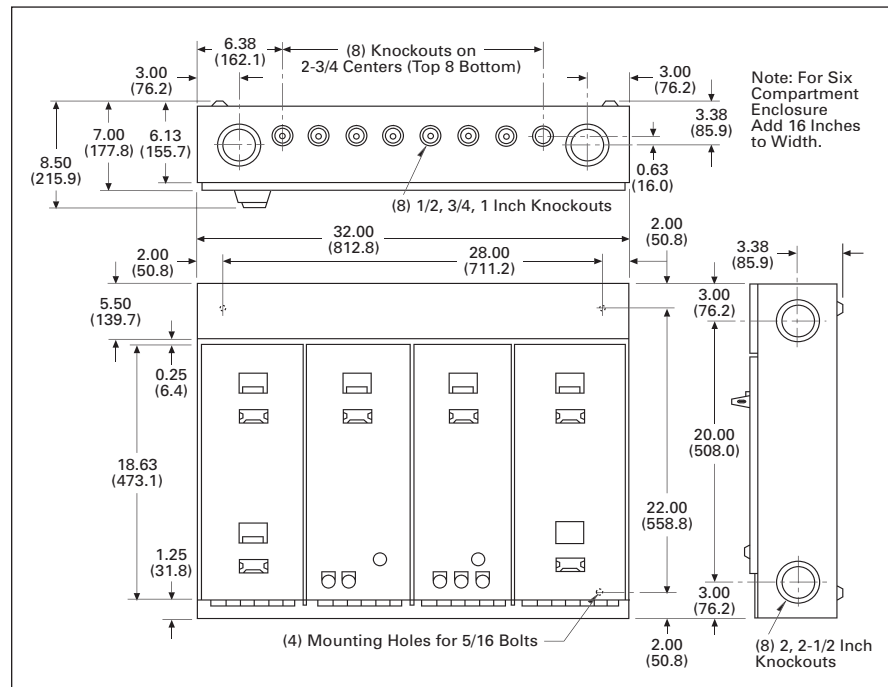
Type 1 Enclosures—Dimensions in Inches (mm)
